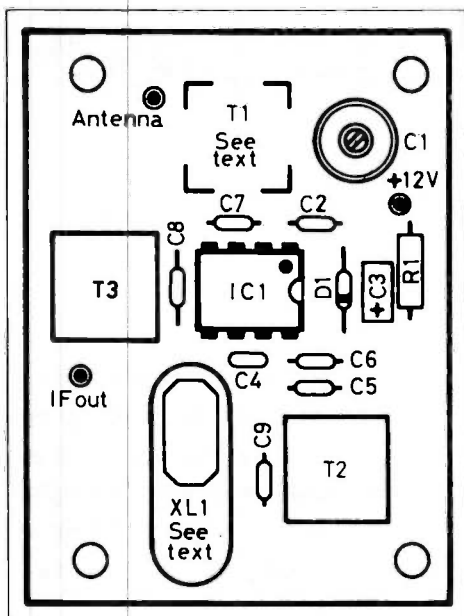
Component layout of the 6 meter converter on the printed circuit board.
